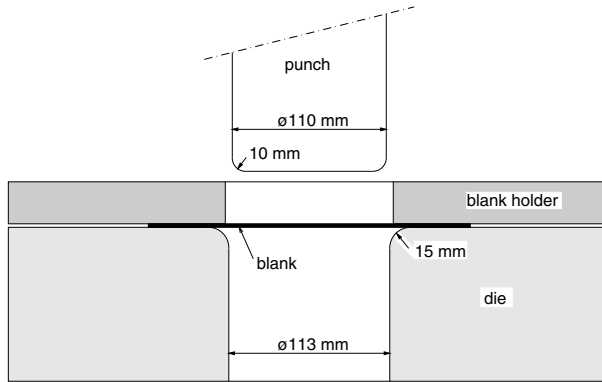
Dimensions of the tools for cylindrical deep drawing.
